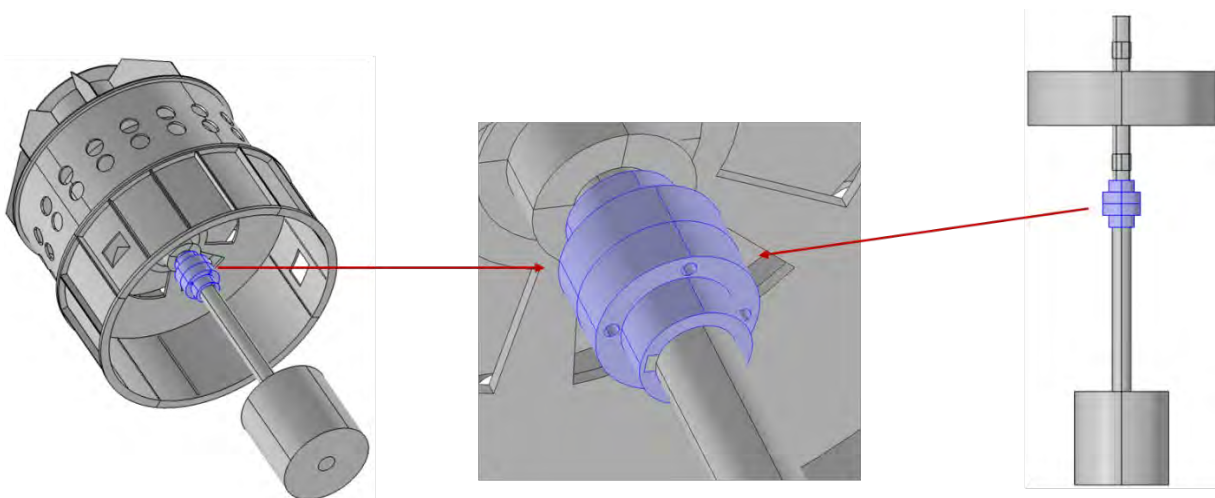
Connection of the rigid flanged shaft coupling with M&P shafts.
